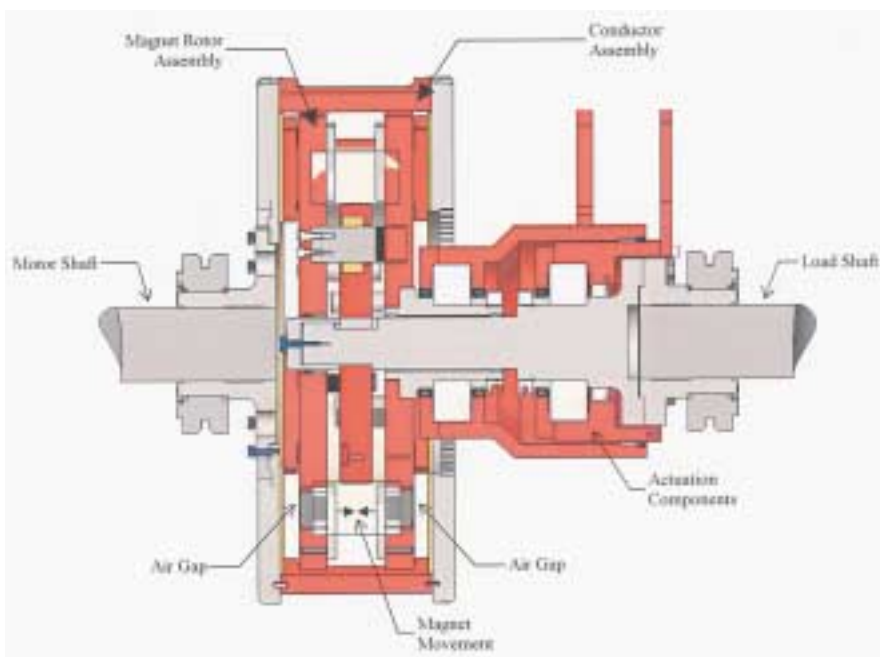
Cross section of a magnetic ASD showing magnet rotor assembly attached to load shaft and conductor assembly attached to motor shaft.
